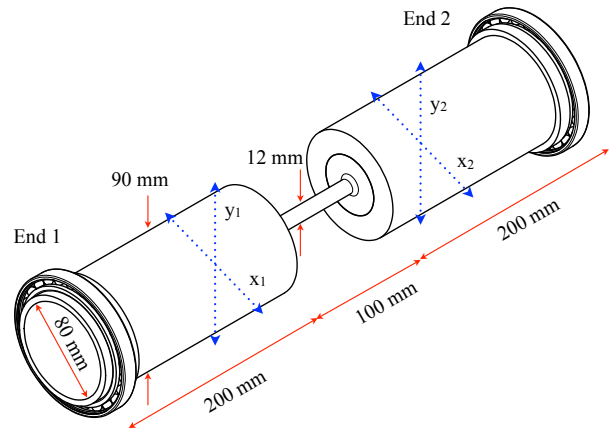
Outline view of variable diameter steel rotor showing major dimensions and axes of acutation
